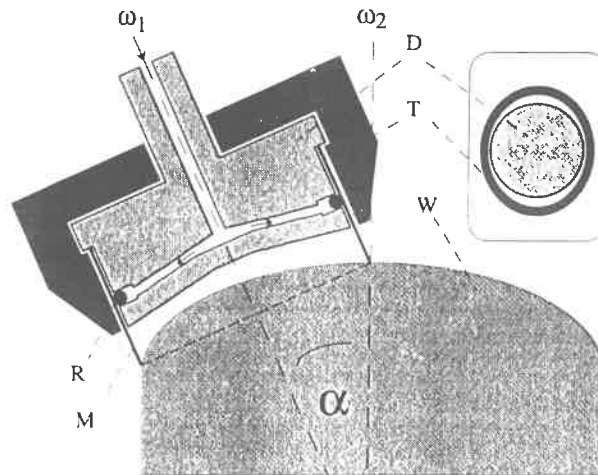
FAUST tool design: T indicates the fixed tubular element, M the machining band, W the workpiece and D a rotating circular element that is driving the band and pressing it by the use of the elastic element R (e.g. a rubber ring) radially outwards against T . (the inset shows a top view)
